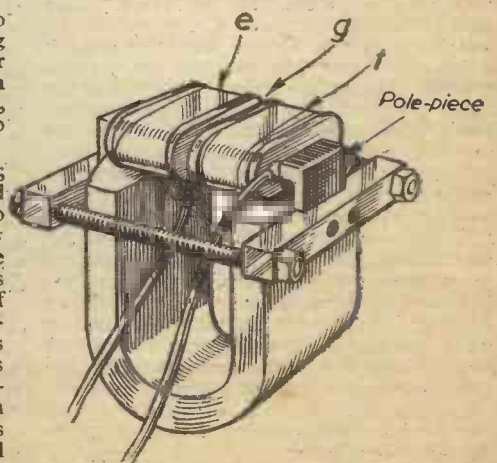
Assembly of the electro-magnetic unit, showing how pole-pieces are clamped to magnet.
